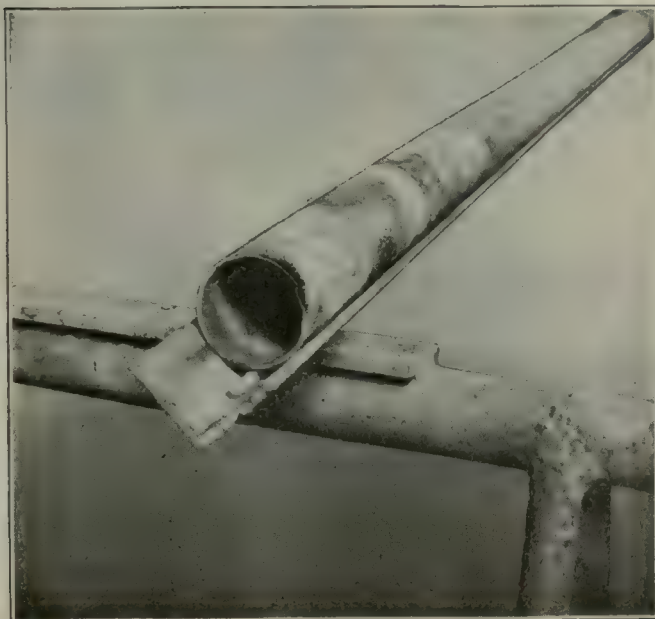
HOLDING PIPE FOR WELDING
